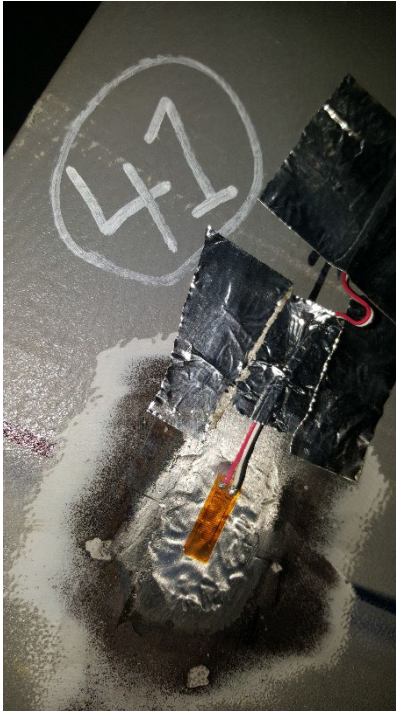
SGBF41 Rear of Bottom Flange of B-end Body Bolster near Center Sill, RH Side
